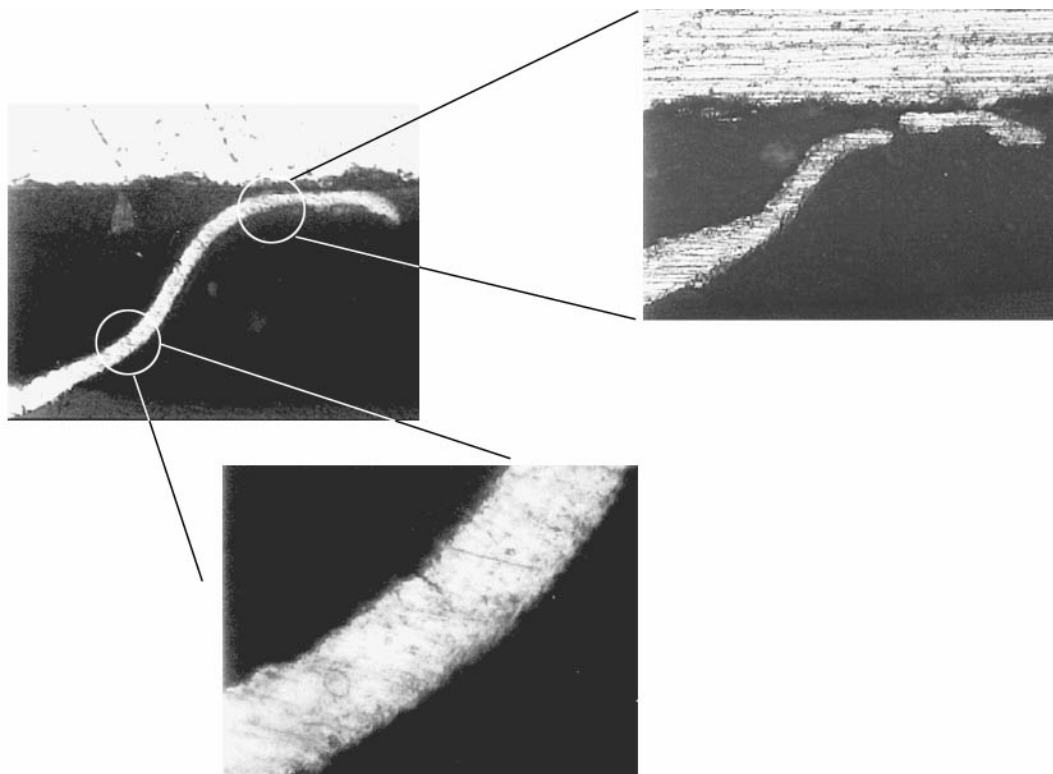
X-section of the Elastomer-on-Flex package after thermal fatigue failure. The solder joints do not fail — the dominant failure mechanism is the thermal fatigue failure of the beam leads internal to the package.
